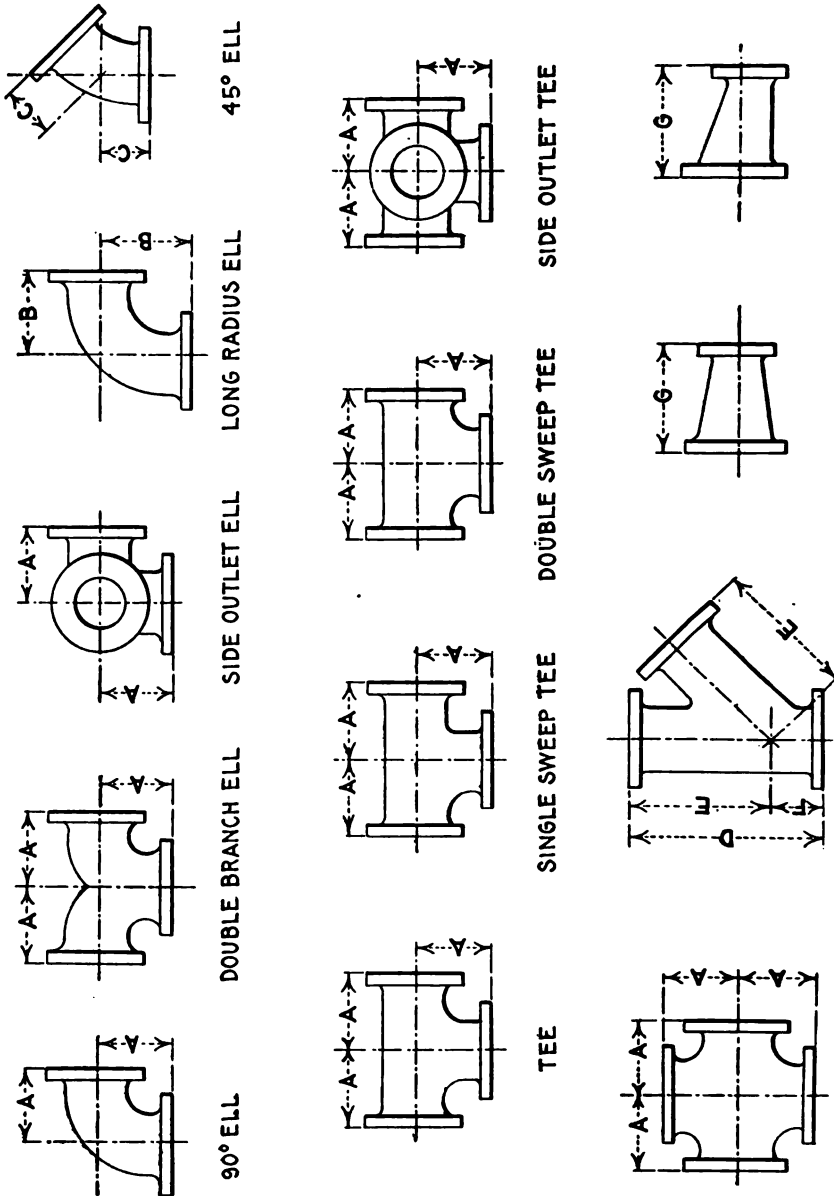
STANDARD TYPES OF FLANGE FITTINGS DIMENSIONED IN TABLES 15 AND 16
